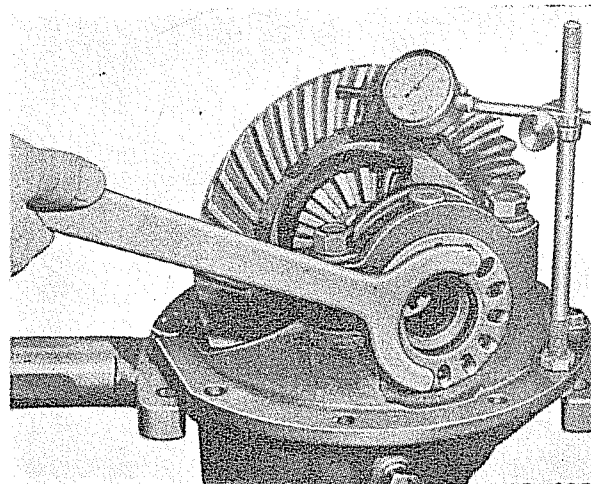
Tightening Tooth-Side Adjusting Nut.
